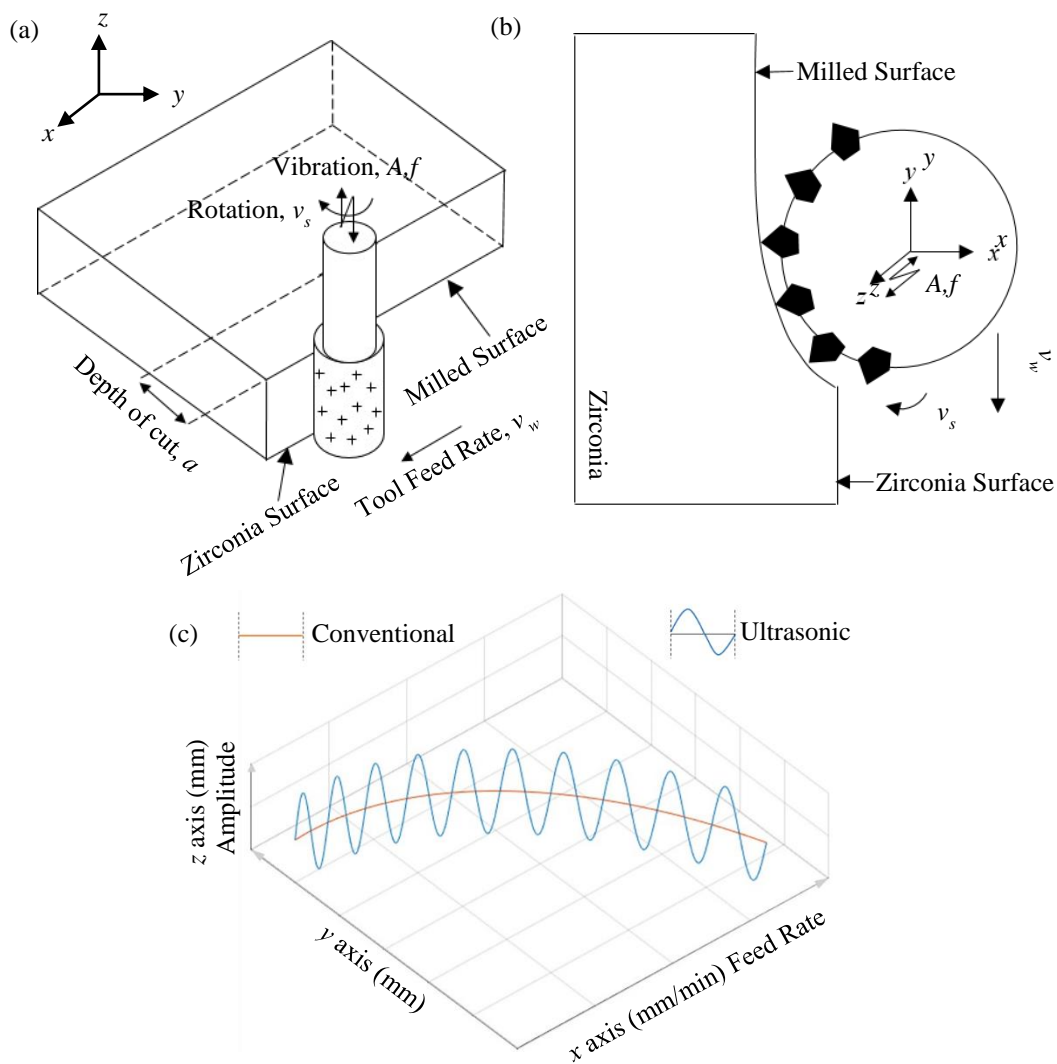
Illustration of conventional and ultrasonic machining processes. (a) 3D diamond machining; (b) 2D diamond grains-zirconia surface contact; and (c) Diamond grains trajectories in conventional and ultrasonic machining.
